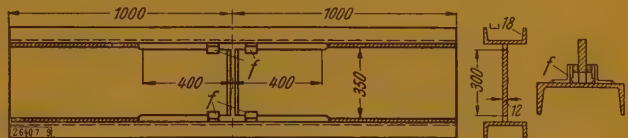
No. 2 type test piece. The plates are welded at the ends to U bars.  $f$  = guide.
